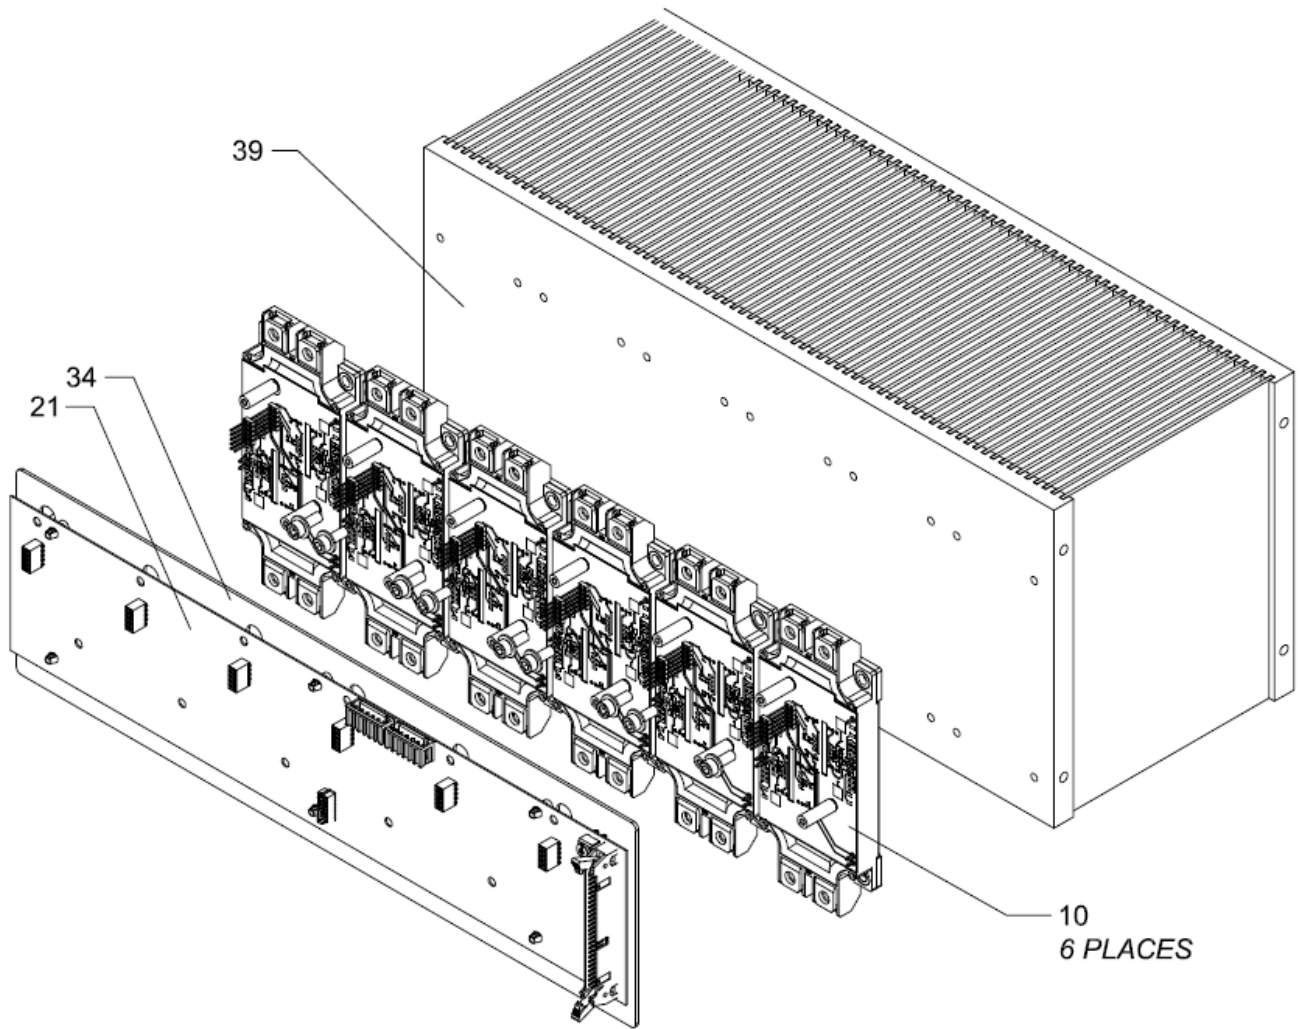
2500+ GPU Illustrated Parts List, Inverter Heat Sink
